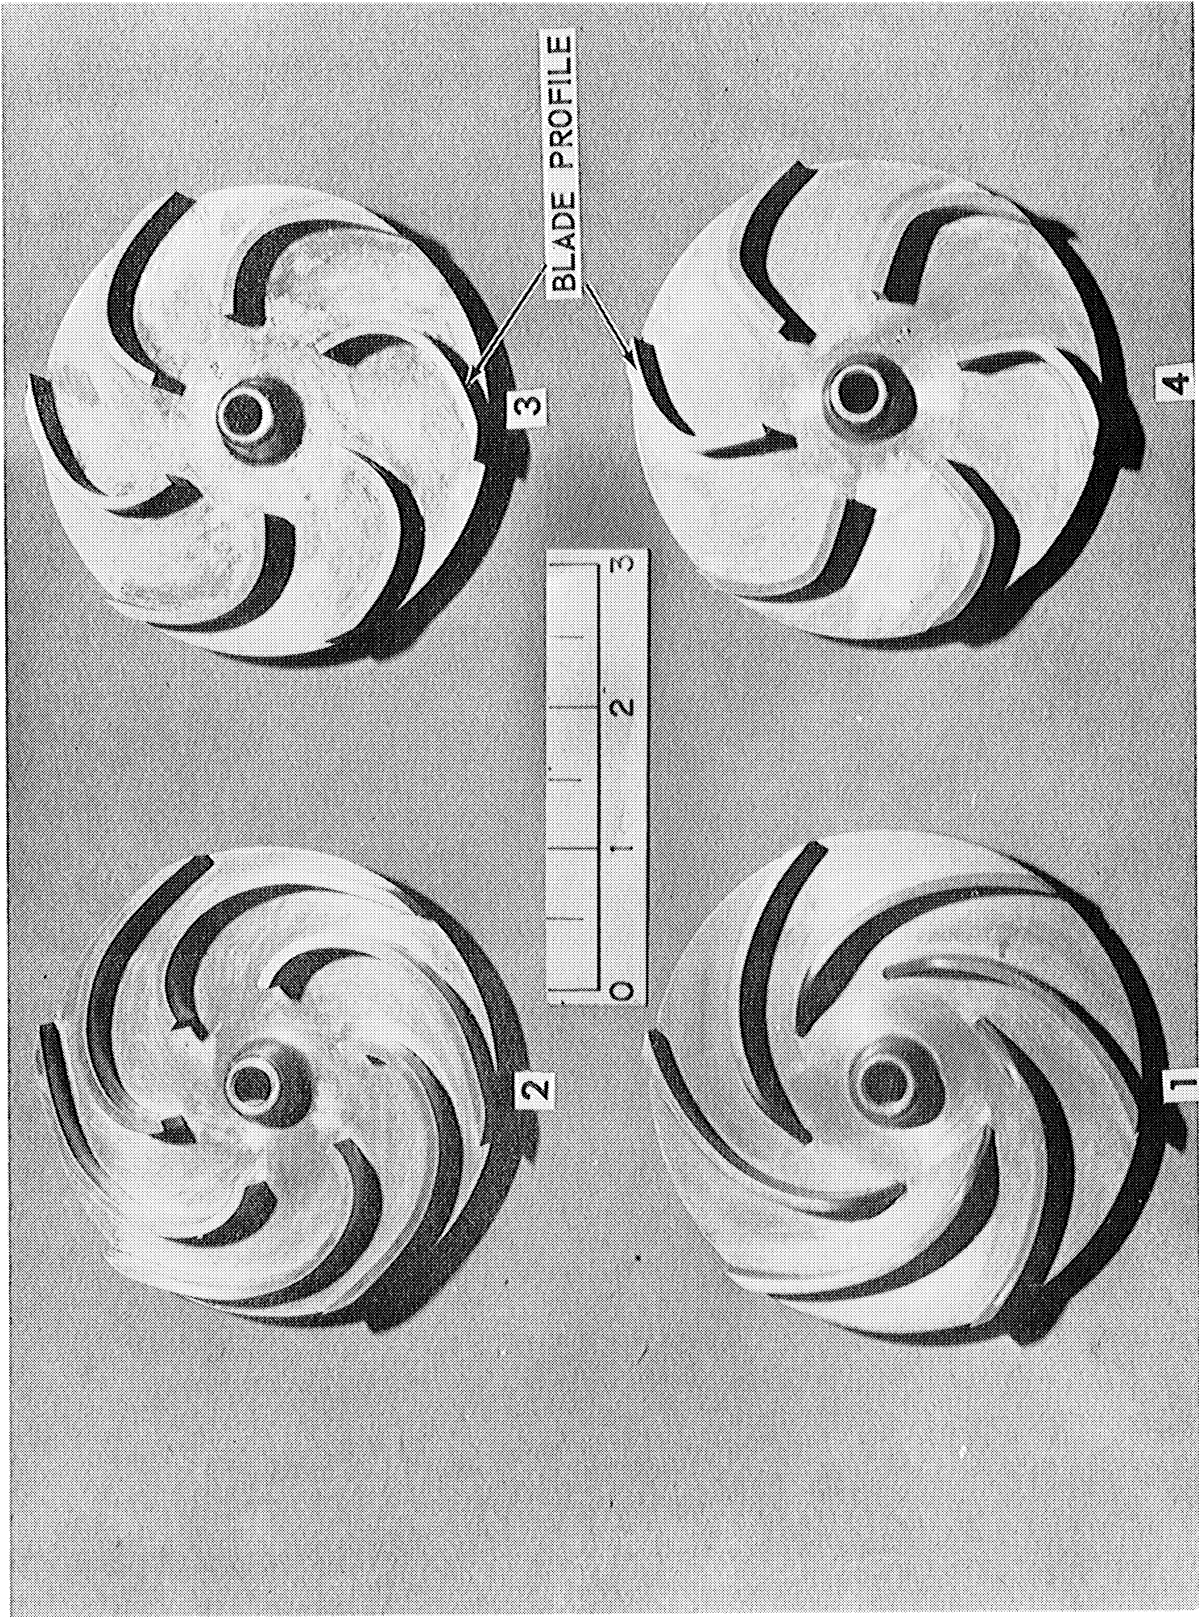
C. Prototype impellers 1, 2, 3, and 4.
